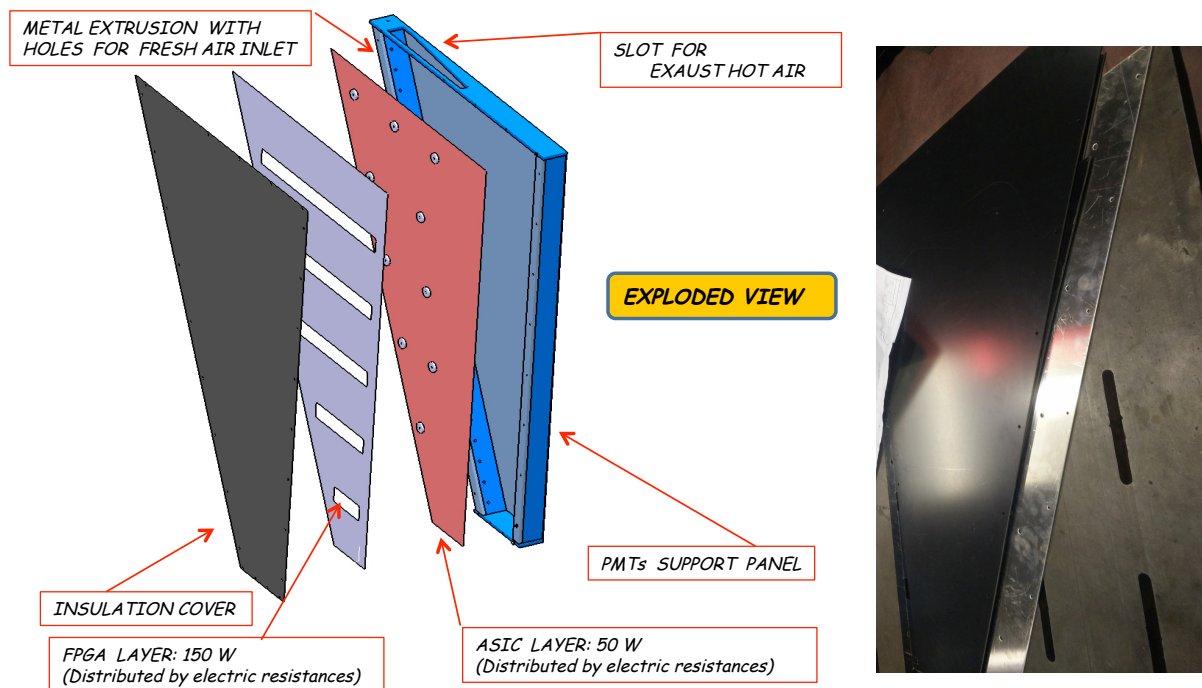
Exploded view of the real scale cooling prototype (halved module) and the relative panels under construction at Frascati Laboratory.
